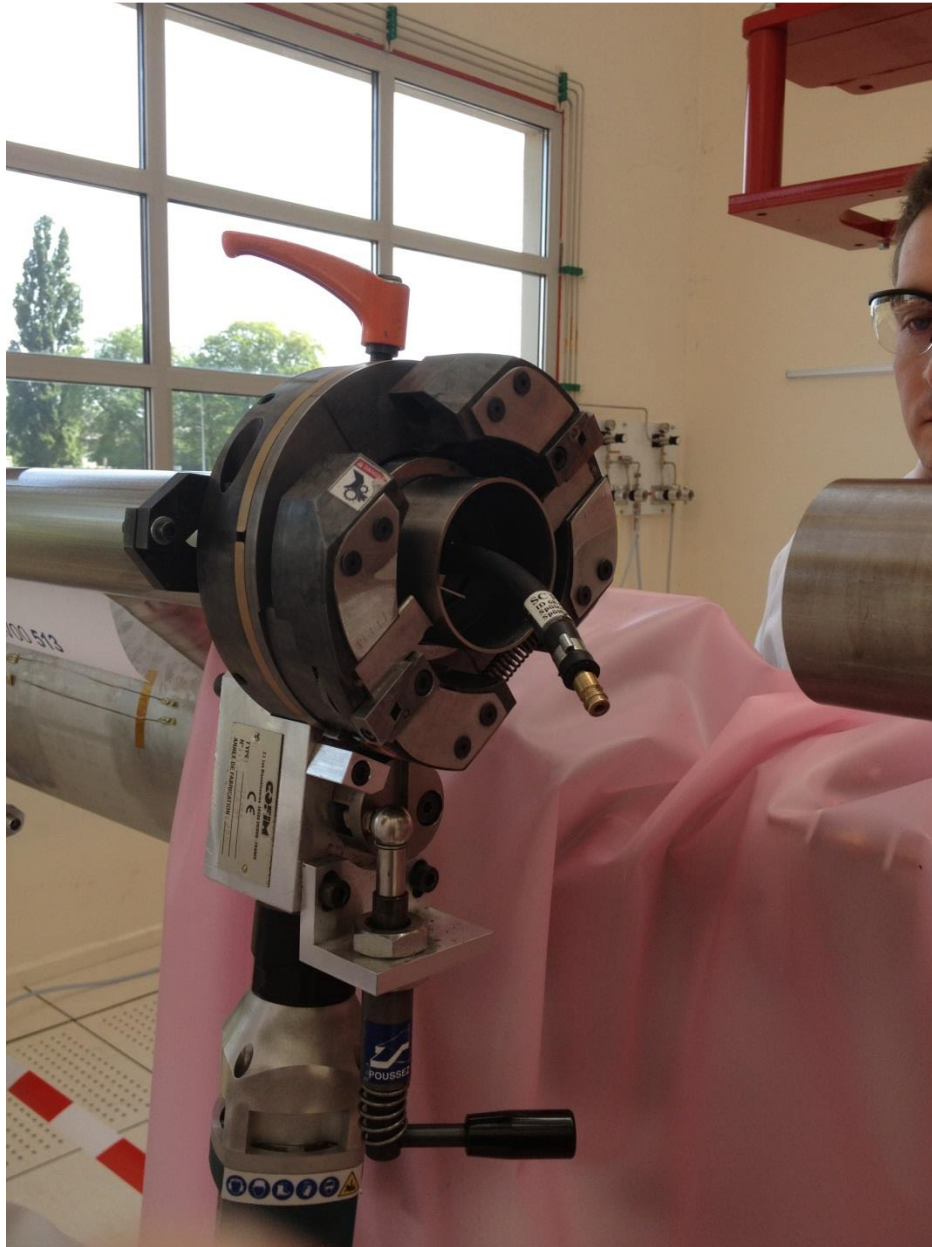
Two-phase line cutting about to start. The gap between the adjacent cavity tubing will very nearly be fit by the bellows weldment.
